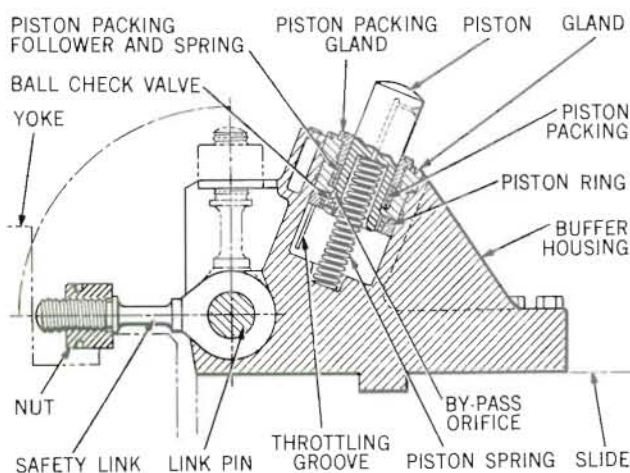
Depression Buffer and Yoke-Locking Device, Sectional View
